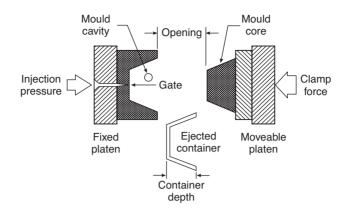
Injection moulding. (Courtesy of The Packaging Society.)
